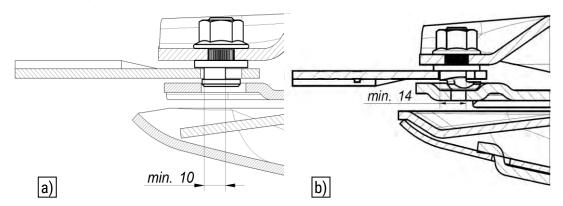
Permissible wear of knife holder pin on disk a) knife base M12 b) knife base M12 with claw
